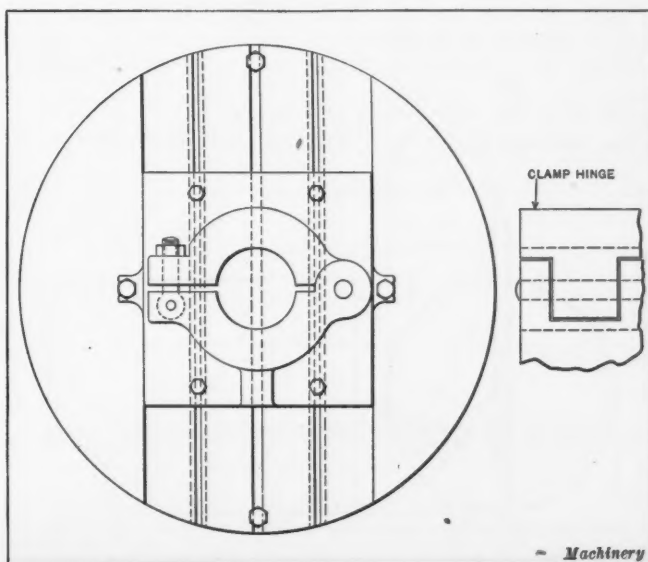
End View of Crankshaft Fixture, showing Hinge and Clamp
